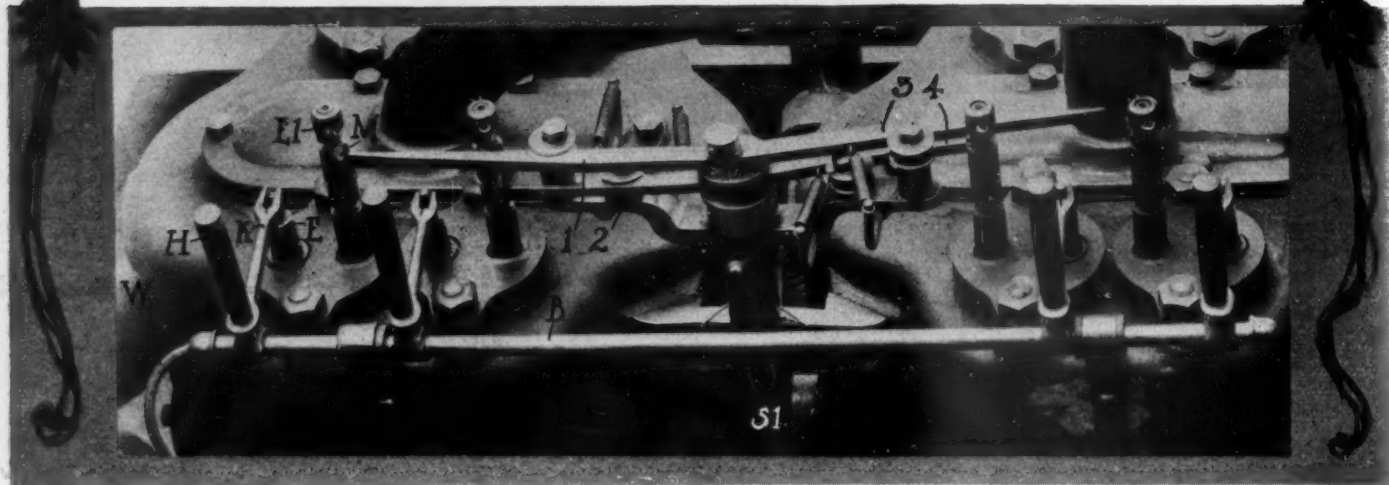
TOP OF GAETH MOTOR SHOWING LOW-TENSION IGNITION PARTS USED AND METHOD OF OPERATING THEM
